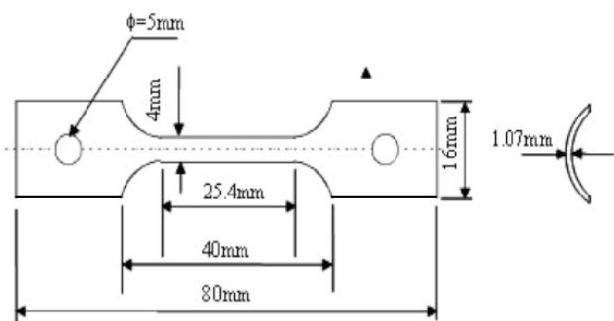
Design of the Test Specimen Fabricated for SSRT Test.
